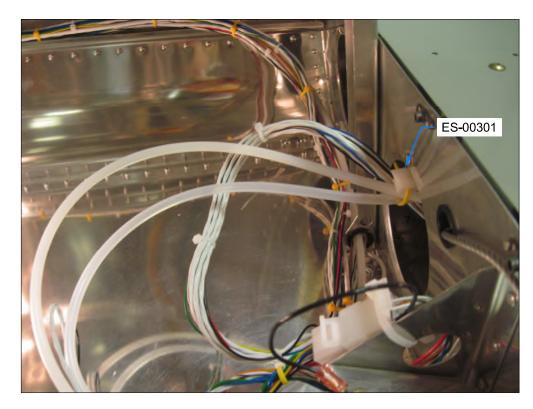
ADAHRS BAGGAGE FLOOR ASSEMBLY IN INSTALLED POSITION
